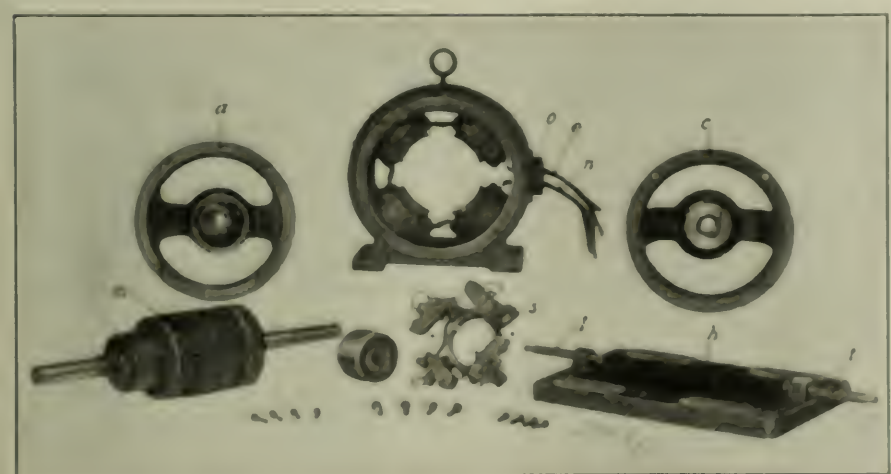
PARTS OF THE MULTIPOLAR GENERATOR SHOWN IN FIG. 292
